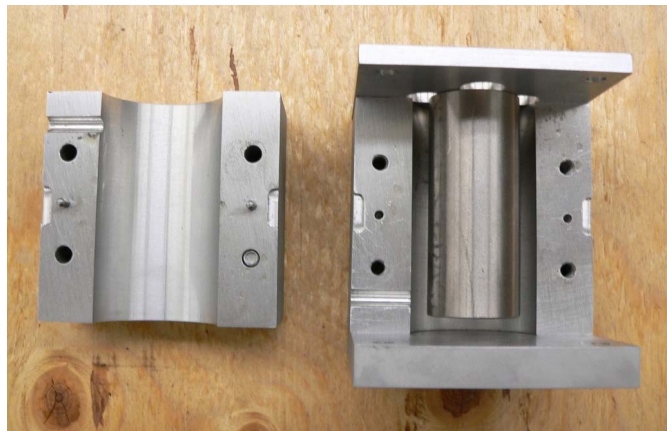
Custom-made mold for overmolding the cylindrical samples. Note that one of the cylindrical substrates is mounted in the right half of the mold; it is attached to the top of the mold via the threaded hole (which will be used to attach the sacrificial zinc anode on the finished sample). Polyurethane is pushed into the mold via the small accessway near the bottom (the left half of the mold is actually upside-down). The mold enables the precise encapsulation of the cylindrical substrates with 0.25 of an inch (6.4 cm) of polyurethane (including the bottom of the sample).
